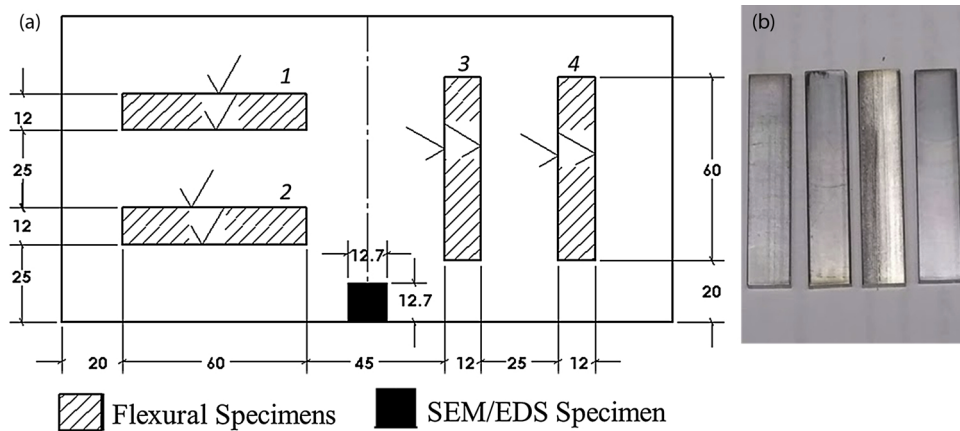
(a) Location of four flexural specimens (60 × 12 × 4.25) and a SEM/EDSM microstructure specimen machined from each casting (in mm) (b) Machined flexural specimens from CHSC.
